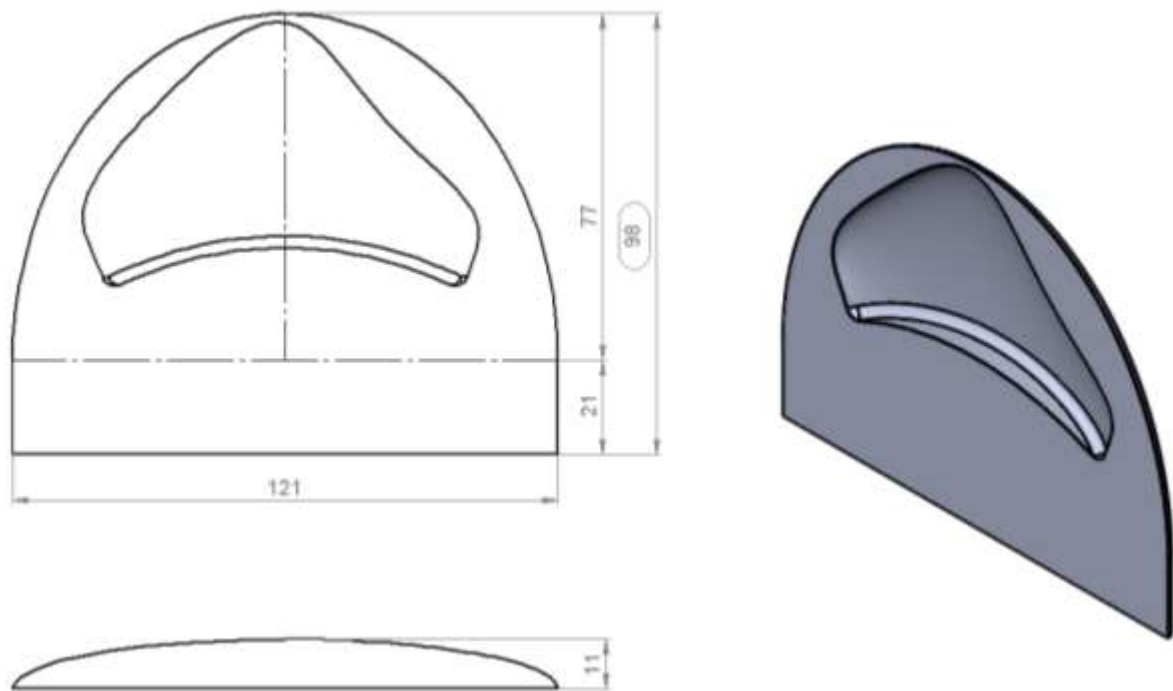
Technical drawing of a fibro-glandular region component with cavity
